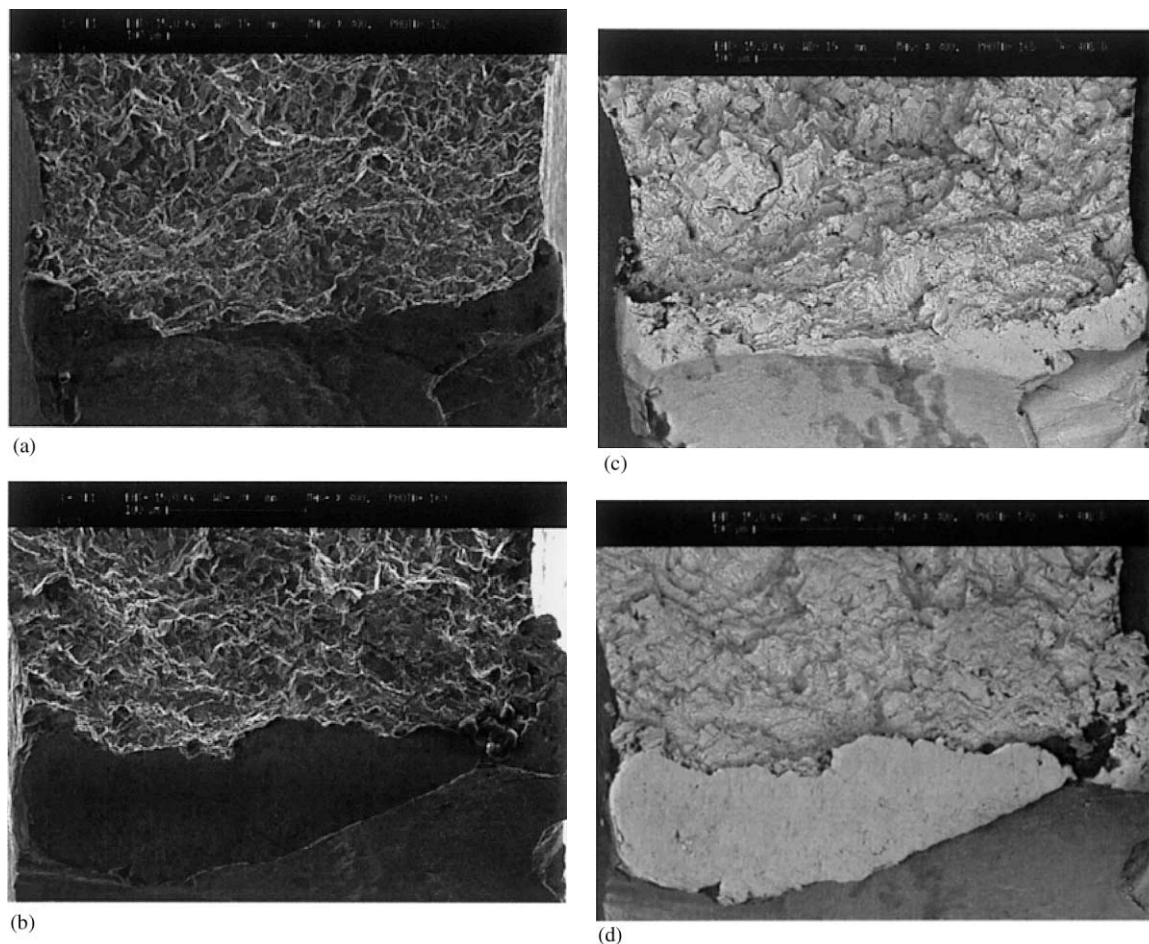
(a) Fracture views of failed notch for sample 4-22. Fracture/notch view; Section A. (b) Fracture views of failed notch for sample 4-22. Fracture/notch view; Section B. (c) Fracture views of failed notch for sample 4-22. Fracture/notch view; Section A. backscatter detector photograph. (d) Fracture views of failed notch for sample 4-22. Fracture/notch view; Section B. backscatter detector photograph.
